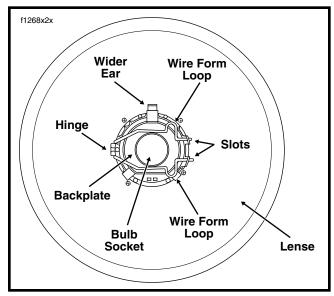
Headlamp Lense/Bulb Assembly (Rear View)
